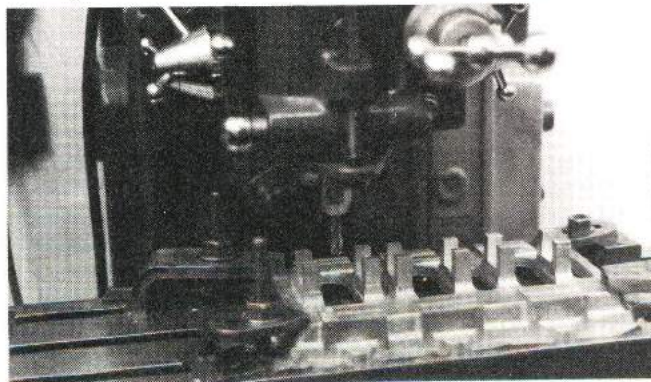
Having established datum faces, the vertical mill is used to complete the machining of the bedplate.
